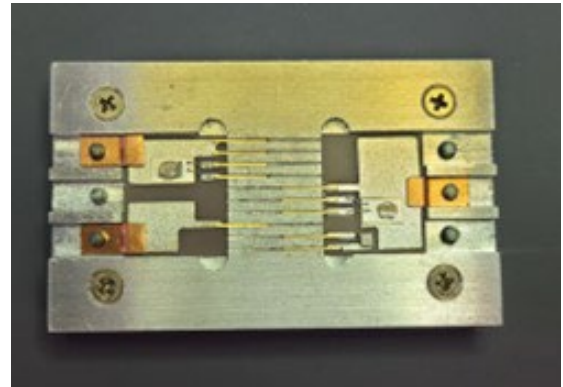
An improved aluminum soldering fixture that aligns signal pins and high-voltage leads during solder-reflow.
